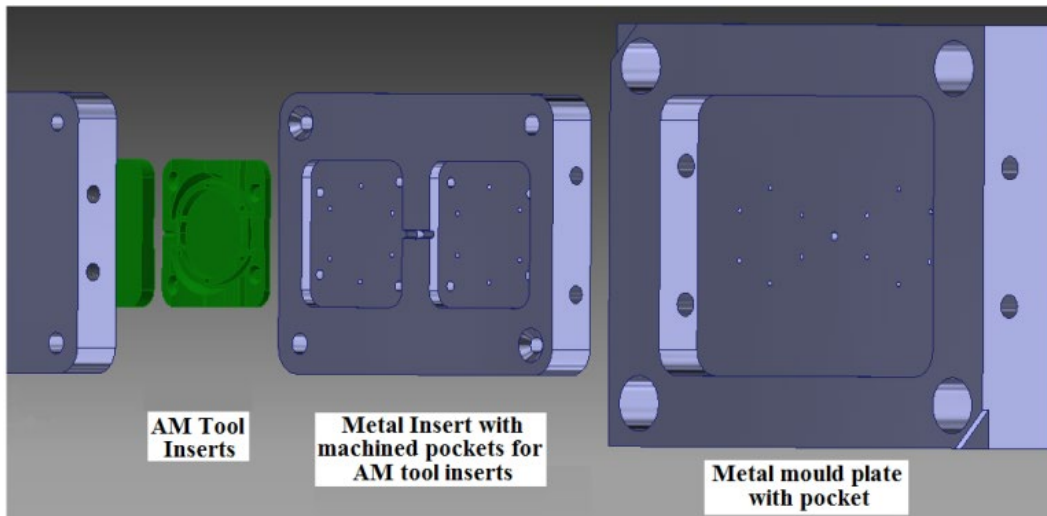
Metal mold plate, metal insert, and 3D printed (AM) mold insert of the ejection side.
